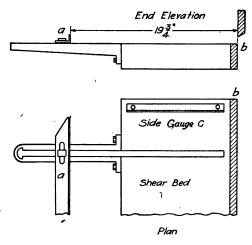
Plan and End Elevation of Squaring Shears.
